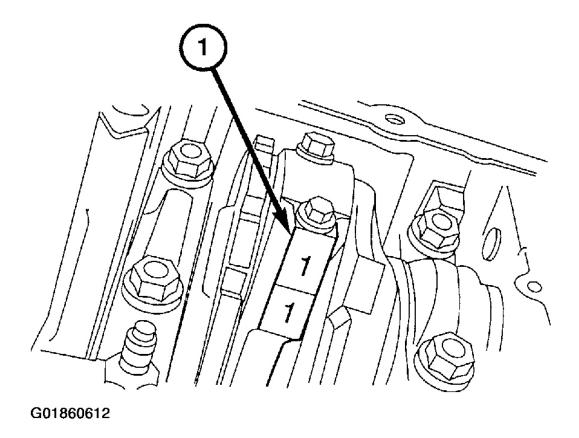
Marking Connecting Rods & Caps Courtesy of DAIMLERCHRYSLER CORP.
